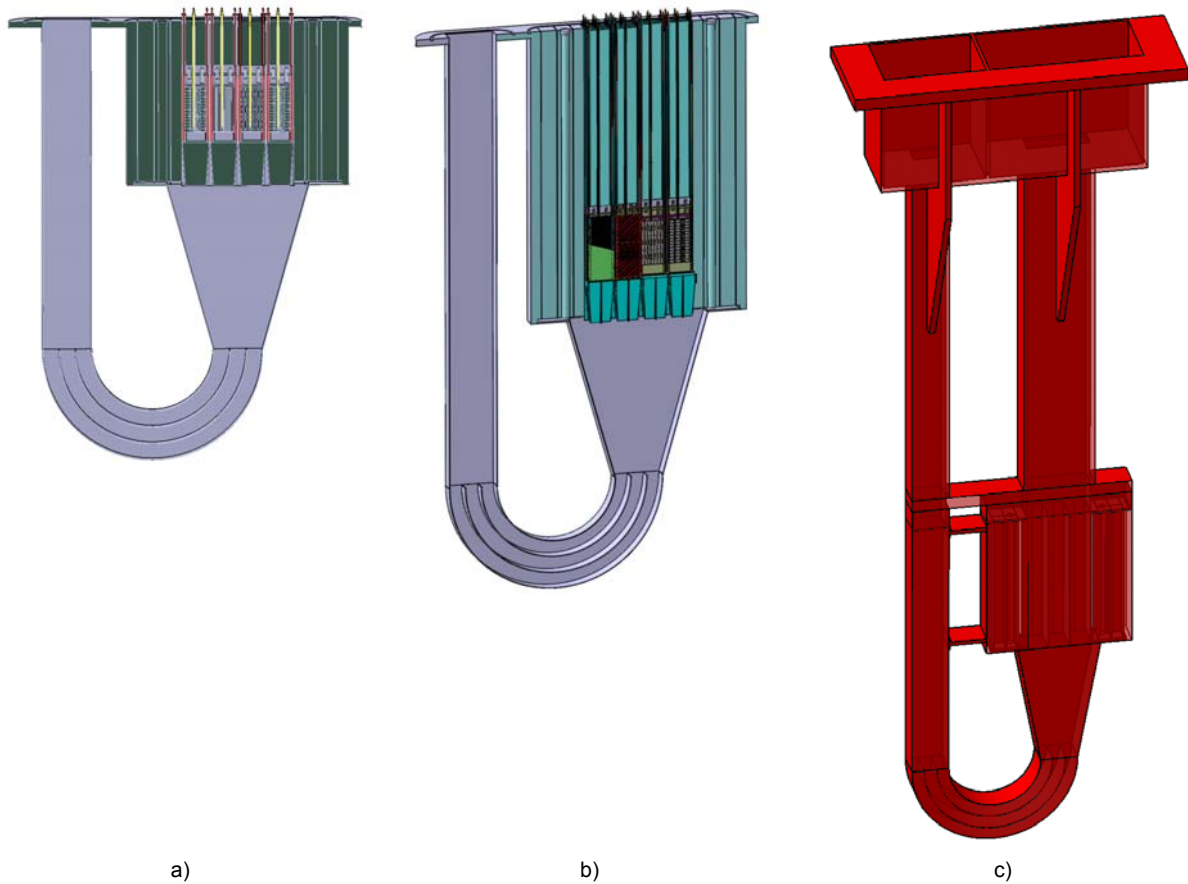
Longitudinal section through the container with inlet and exit plenum; a) container with (340 mm) 400 mm, b) 550 mm height and flange, c) 400 mm and an inner flange strutting the container wall from inside
